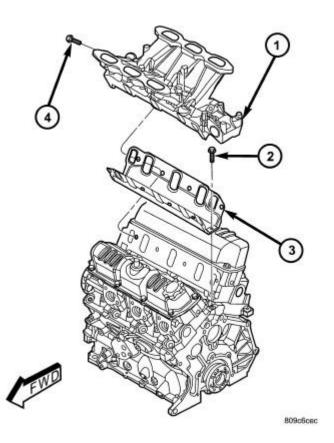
INTAKE MANIFOLD - LOWER Courtesy of CHRYSLER LLC
